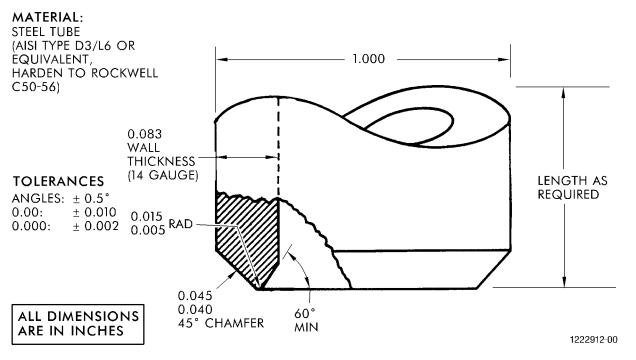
Spherical Bearing Swaging Tool LMT 807
